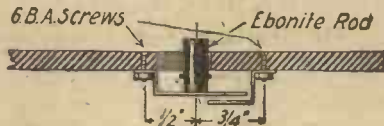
The switch is assembled as shown, the ebonite rod forming the push-stud.
